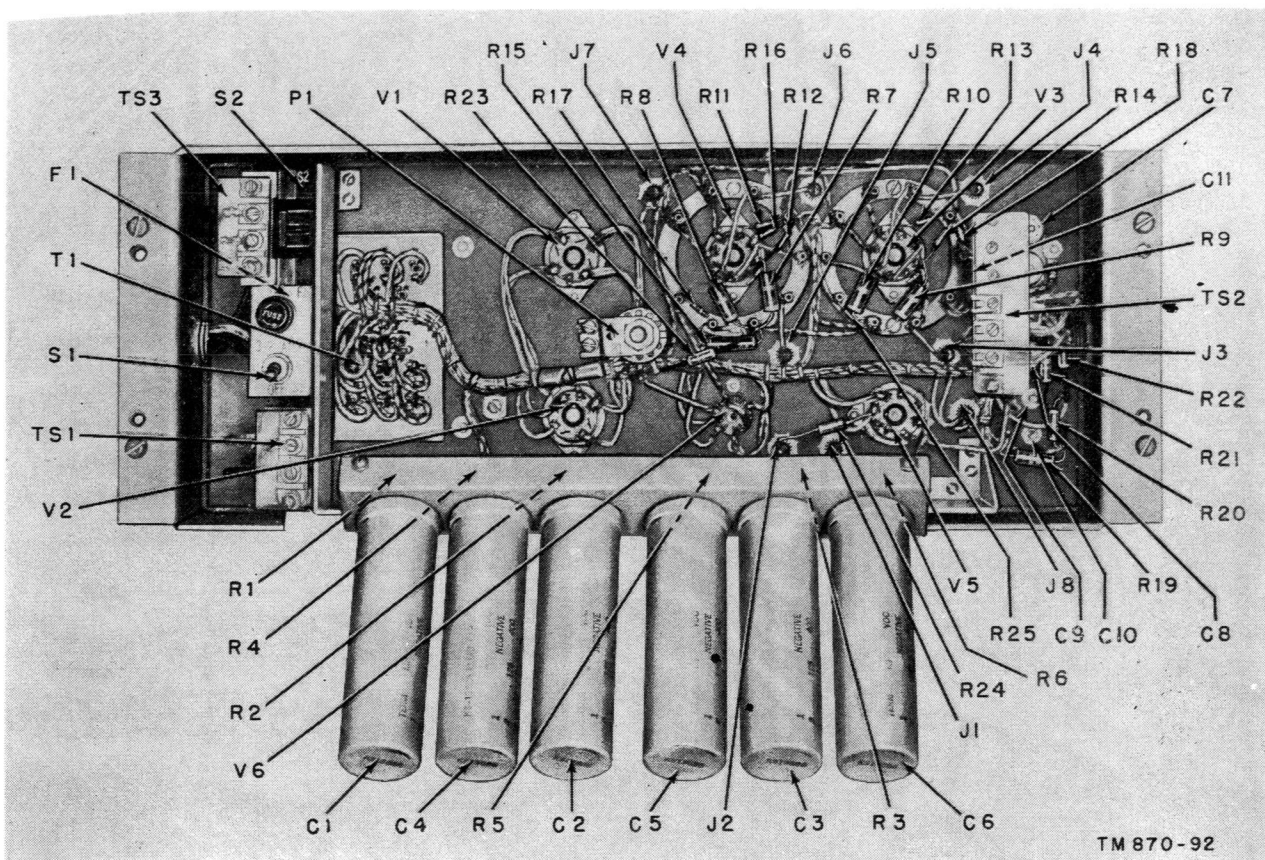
250-volt rectifier panel 7, front view, component locations.
